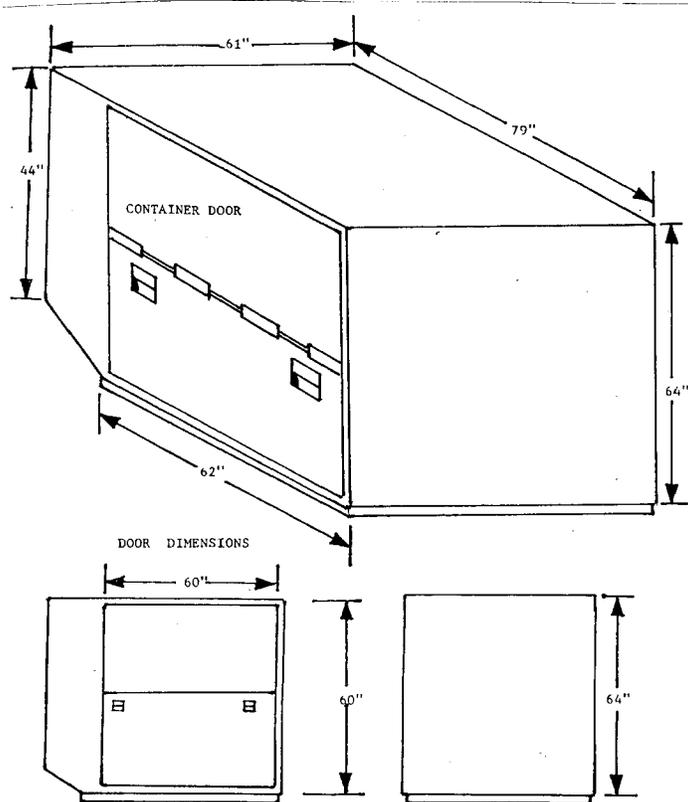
LD-3 CARGO CONTAINER DIMENSIONS
